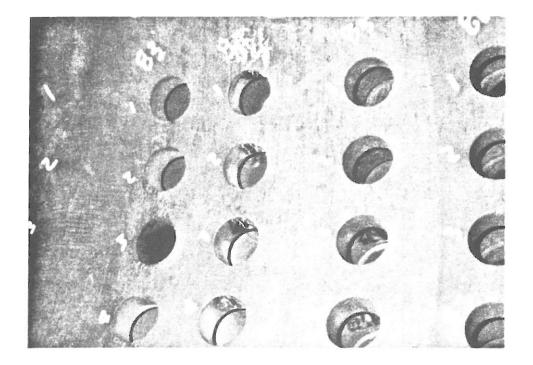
Inside surface of steam drum having bore hole cracking in the circumferential ligament
